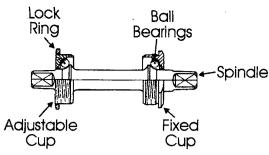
A cup and cone bottom bracket assembly for a three piece crankset
